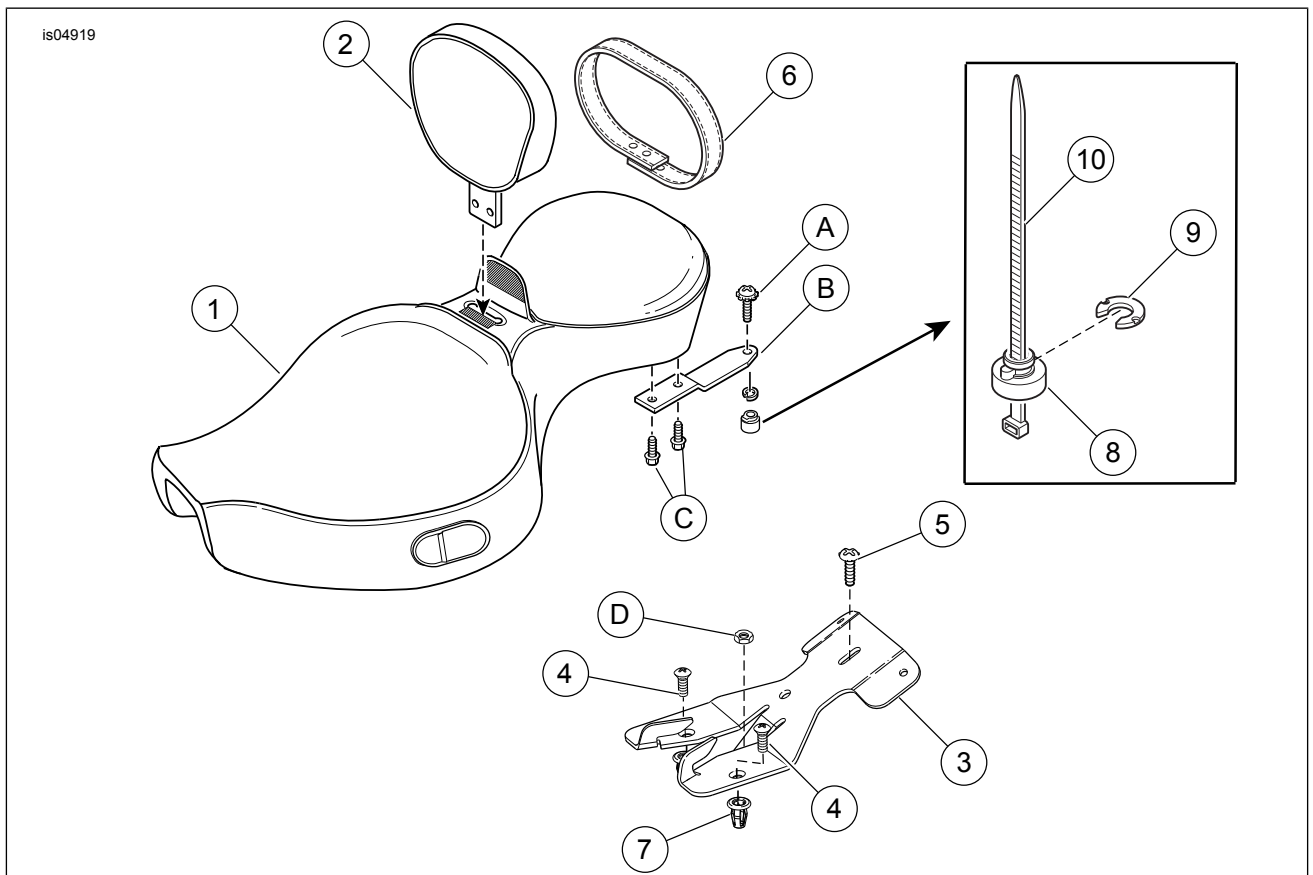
Service Parts: Seat with Adjustable Rider Backrest (generic style shown)
